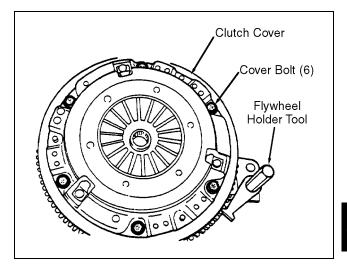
D-1. Clutch Cover and Disc Removal and Replacement
